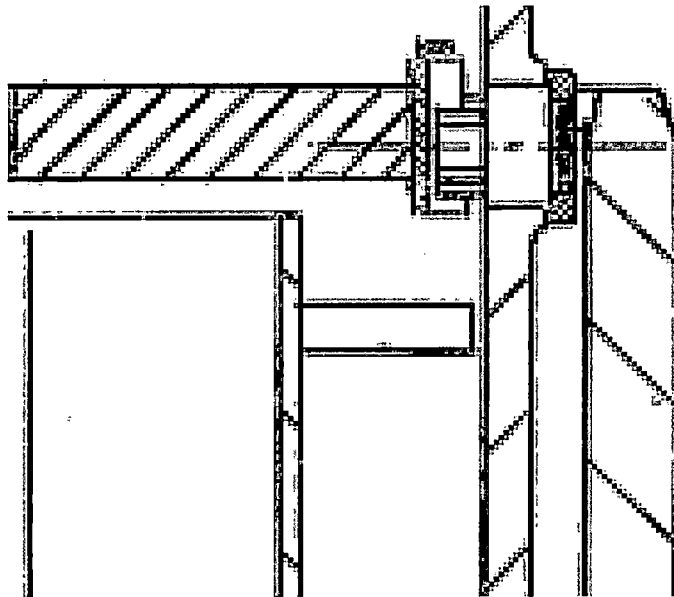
Core Shroud Outlet Design for Palisades and Fort Calhoun
